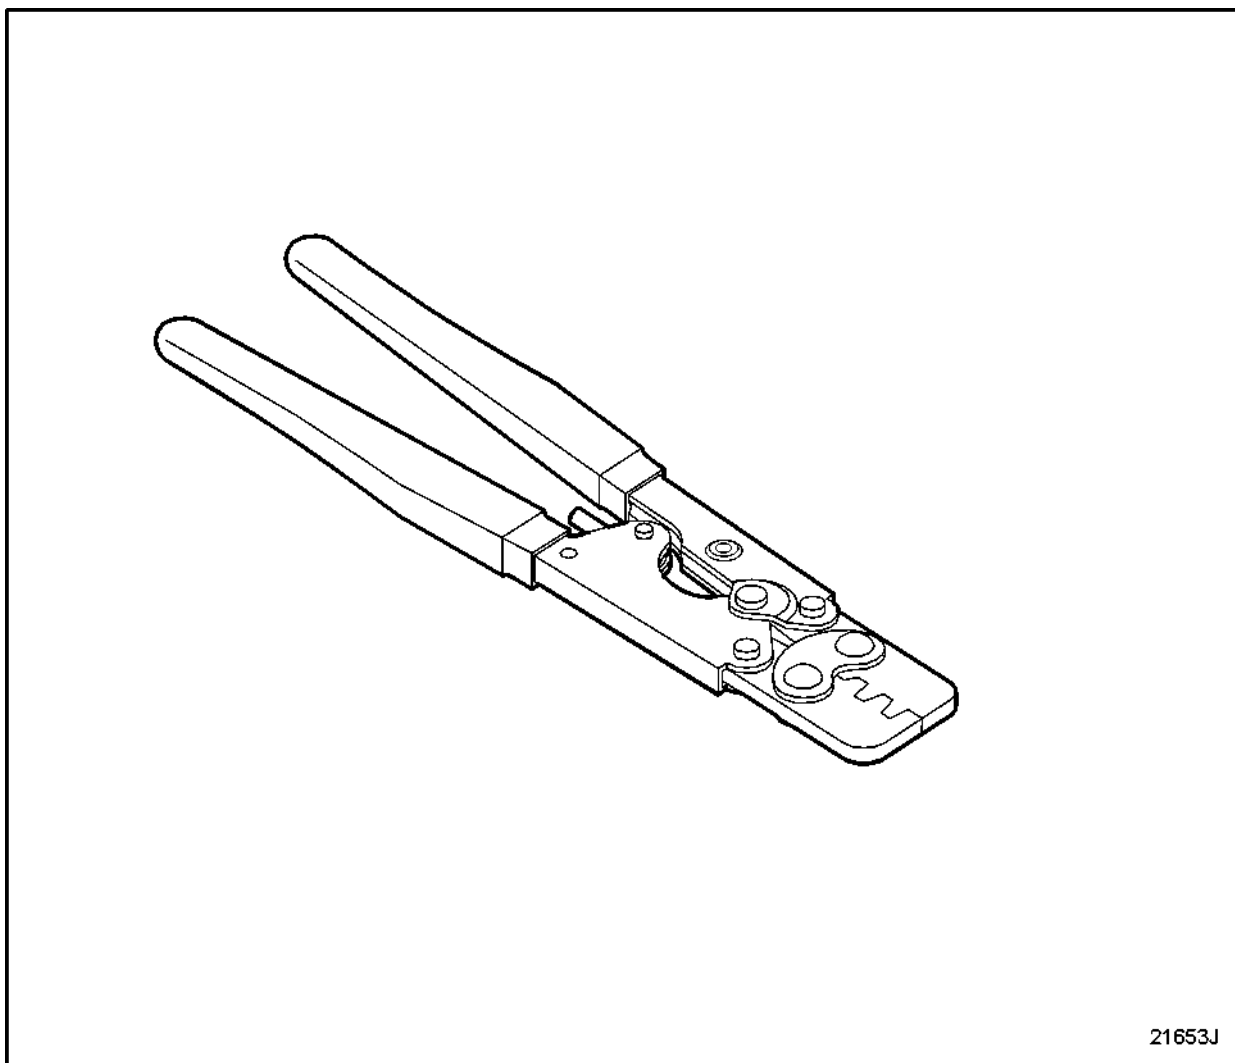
Terminal Crimper (Metri-Pack 280),J 39848
